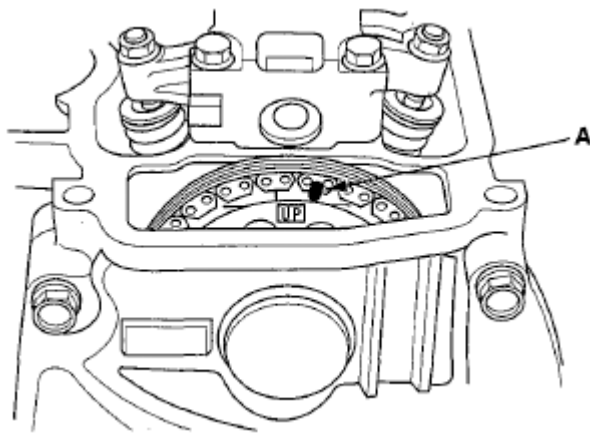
Identifying Mark On Camshaft Sprocket & Cam Chain
